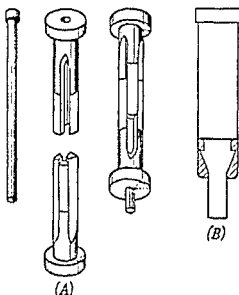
Sleeved types, commercial punches: (A) Durable Punch and Die Co.; (B) Pivot Punch and Die Corp.
